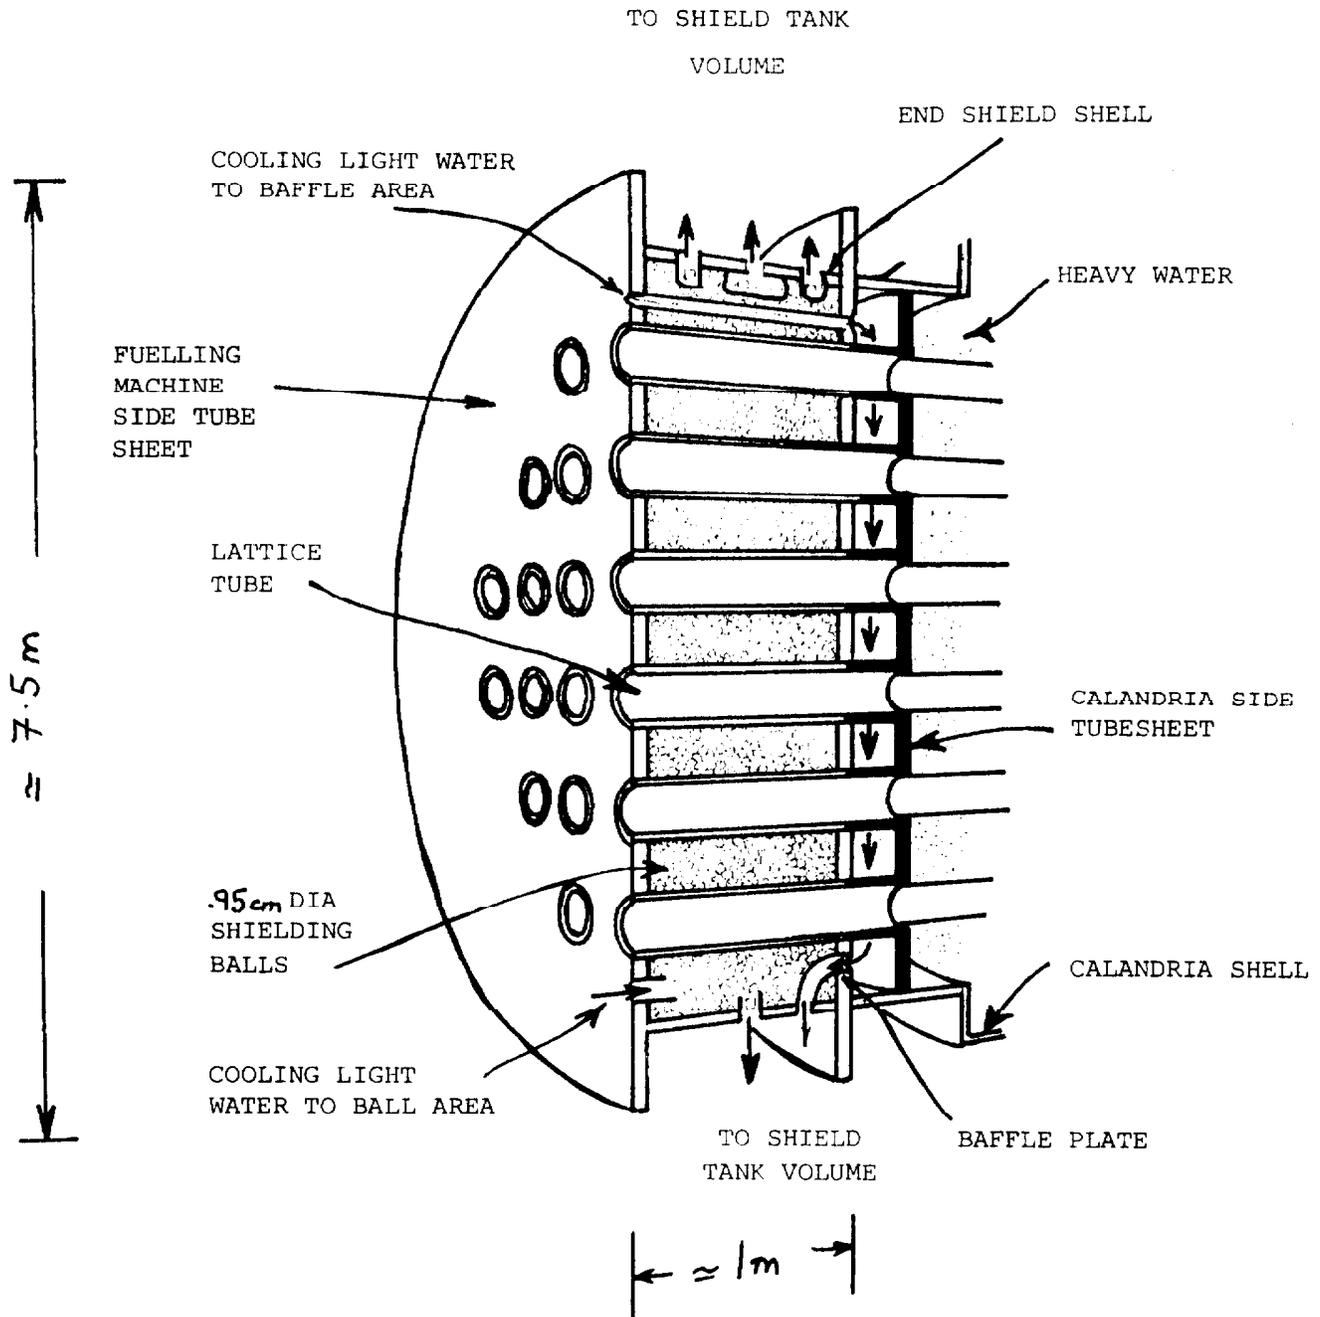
END SHIELD-SHIELD TANK COOLING (BRUCE GSA)
